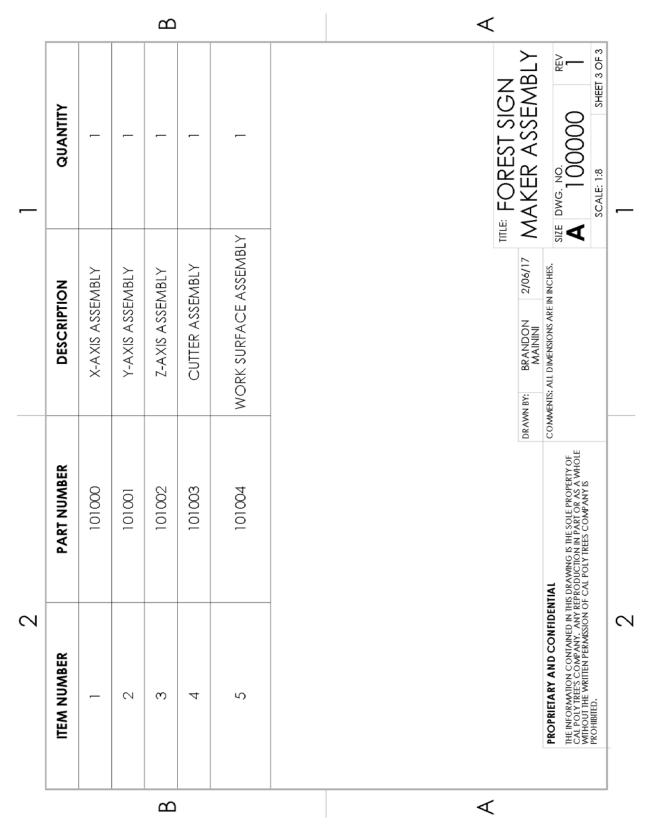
Forest Sign Maker Assembly Detail Drawing (Page 3 of 3)
